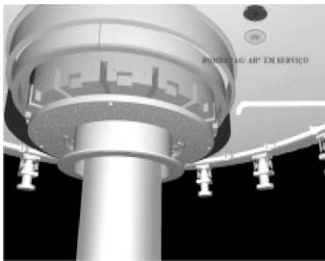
Oil injection in the sliding slippers of the machine thrust bearing.
